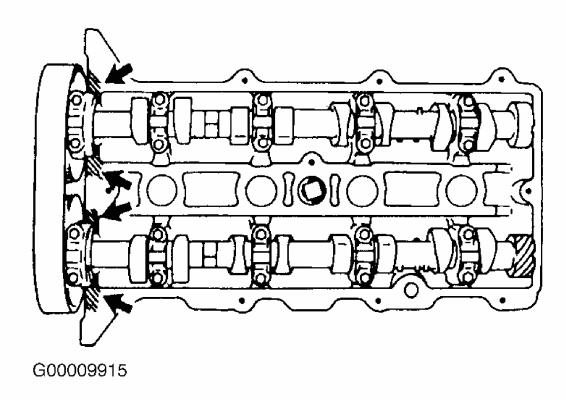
Applying Sealant To Cylinder Head (Protege) Courtesy of MAZDA MOTOR CORP.
